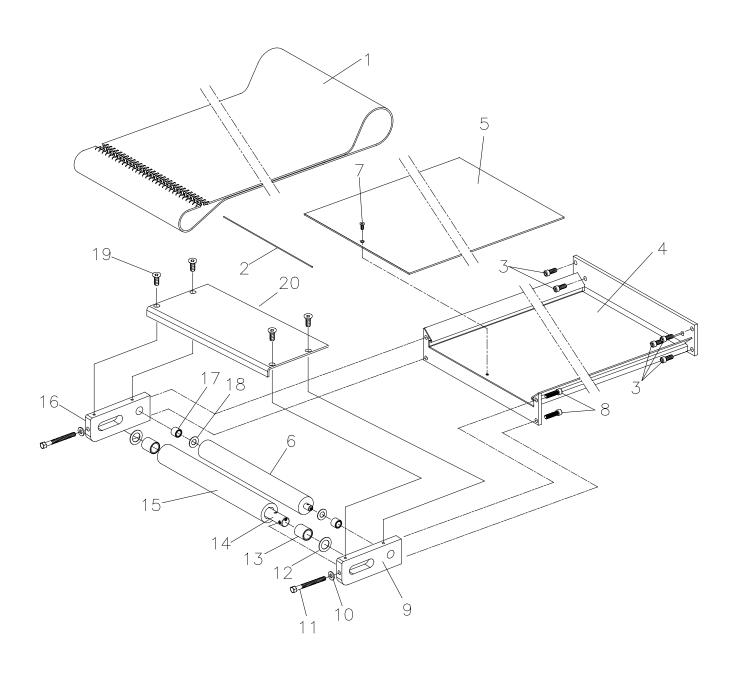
A. FLUSH MOUNT TENSION END COMPONENTS
